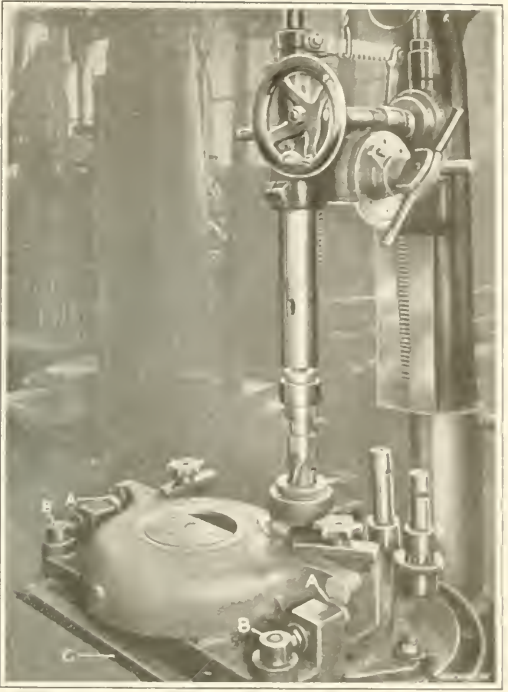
Reed-Prentice 26-inch Upright Drill equipped with "Magic" Quick-change Chuck, Tools and Jig for boring, reaming and chamfering Hole for Starter-box Bearing on Flywheel Housings
